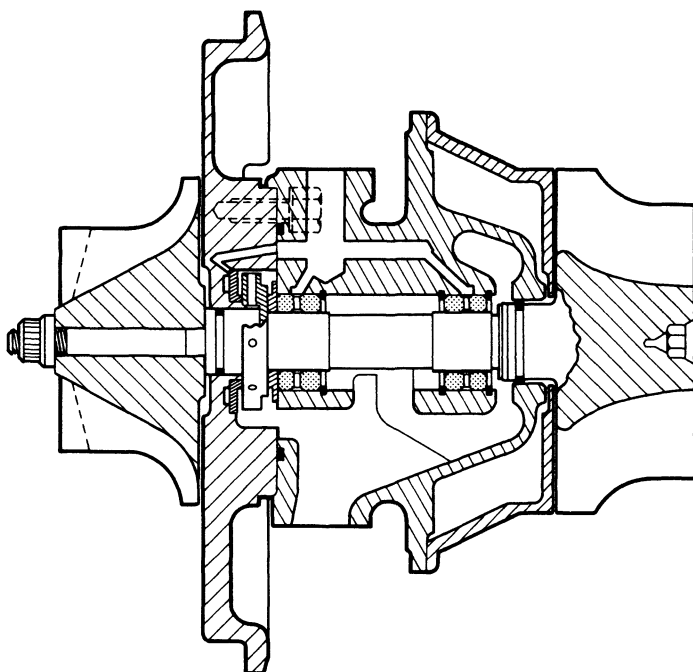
Floating bush plain bearing mounting (Garrett)
